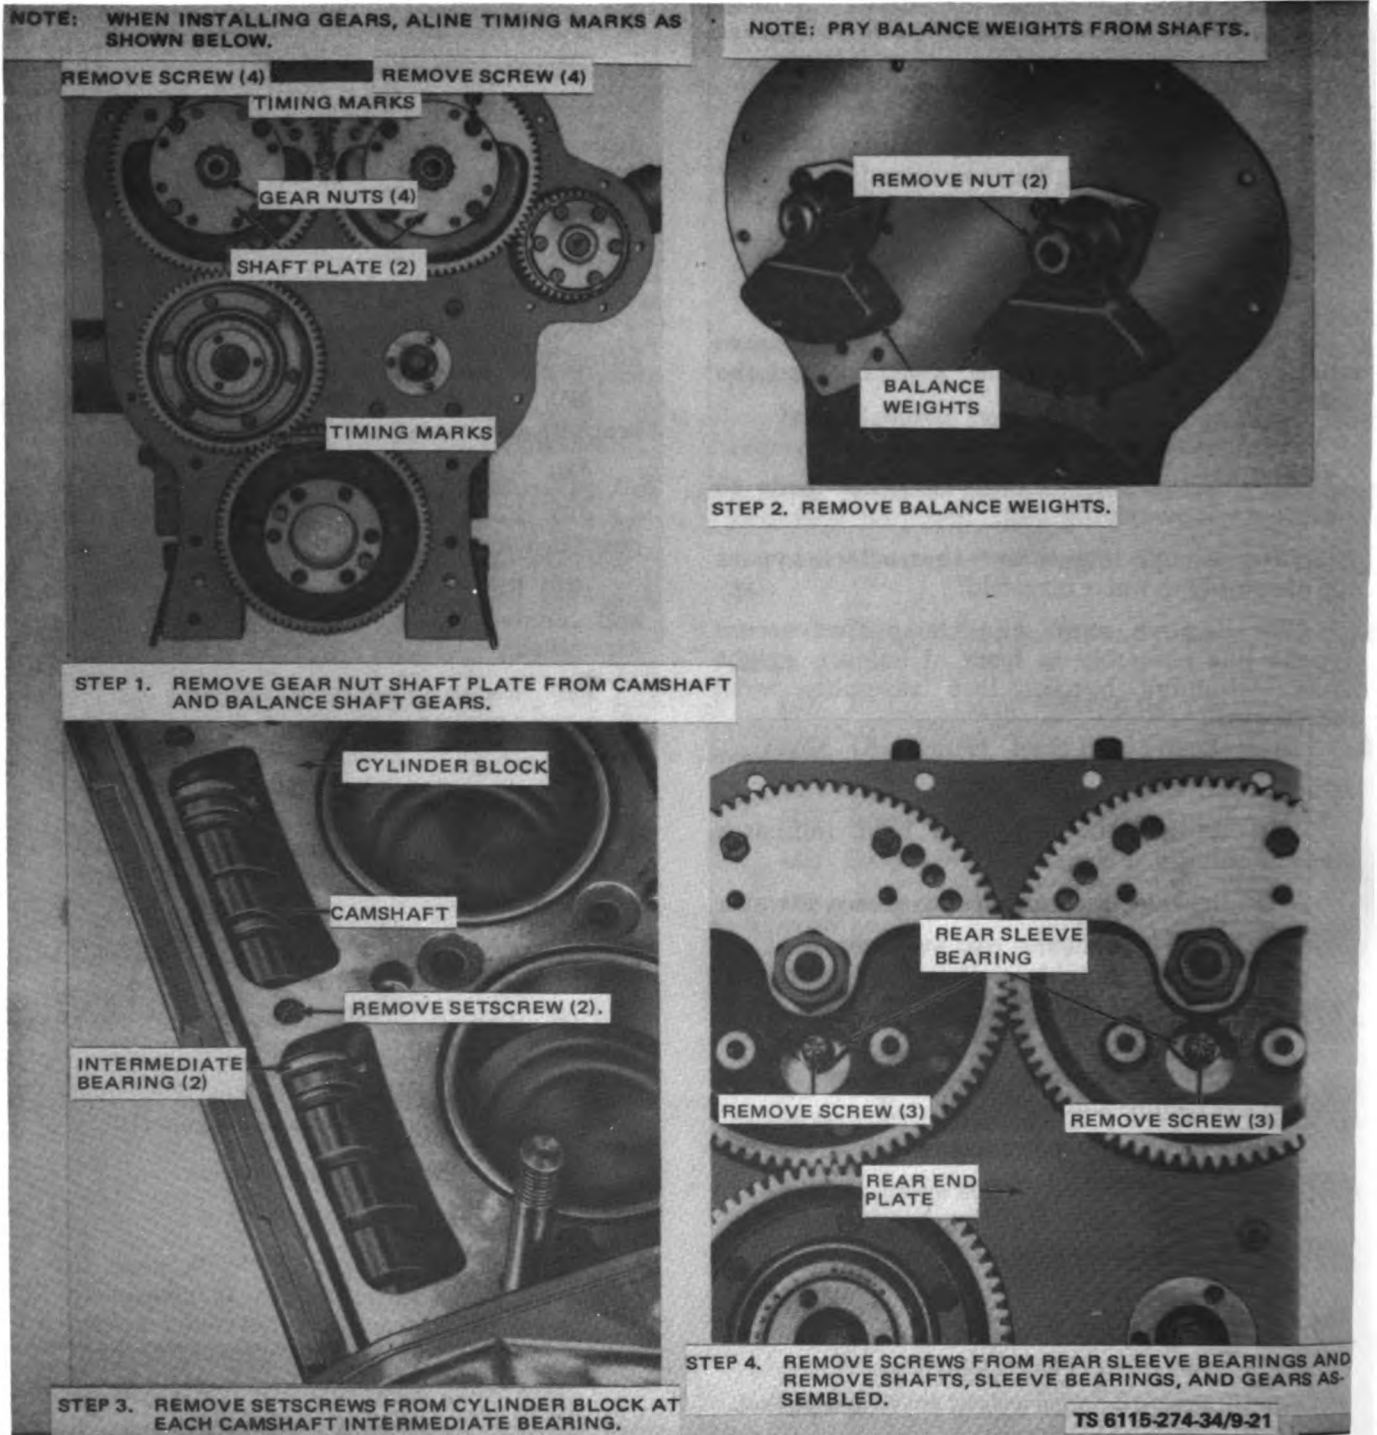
Timing Gears and Shafts, Removal and Installation
